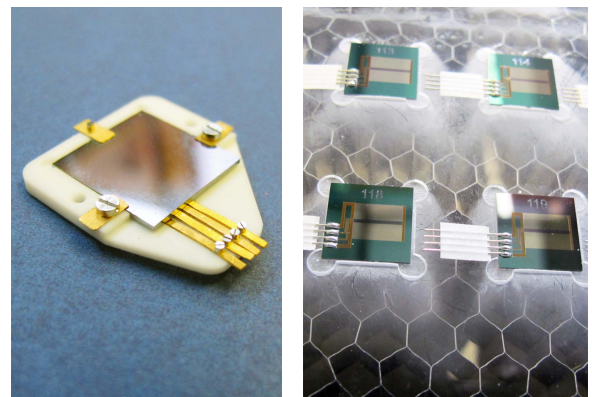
Left: custom-built silicon wafer holder. Right: labeling of printed circuit boards on the laser engraving system.
